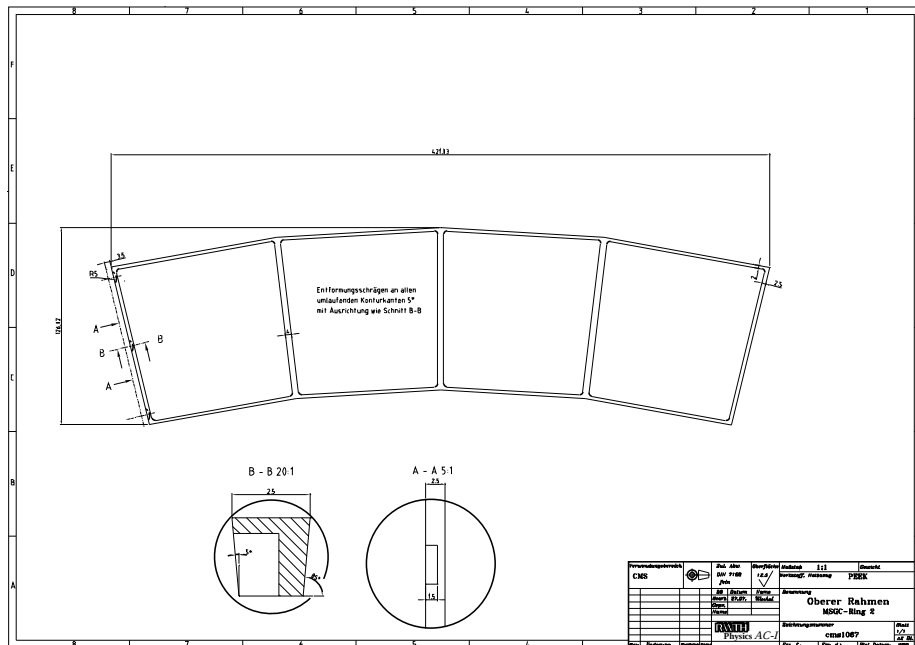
Technical drawing of the stabiliser frame of an mf2 module.
